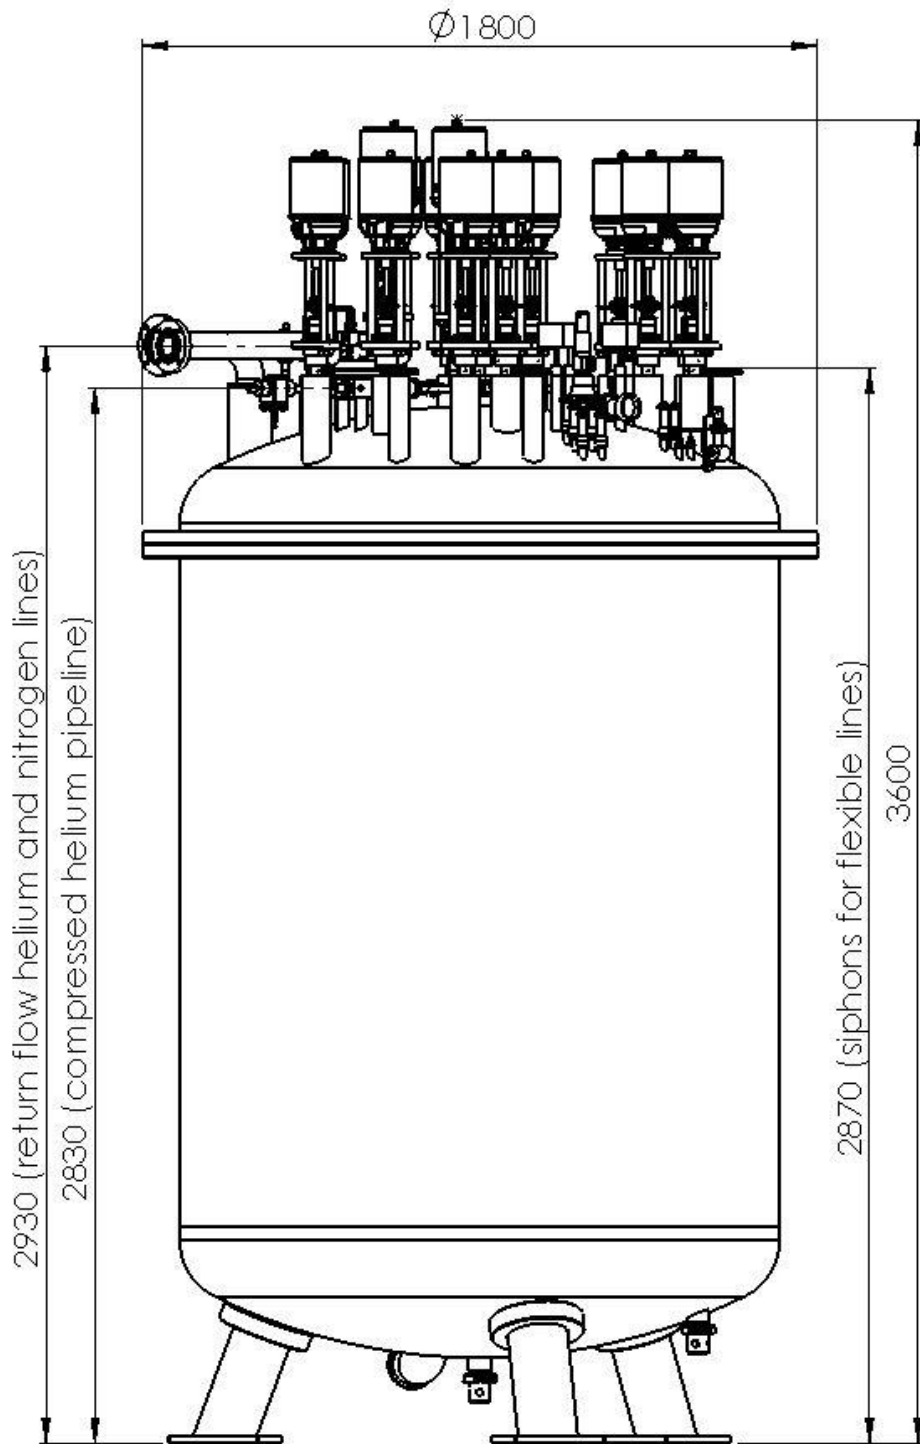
Side view of the refrigerator system for the MPD with geometrical dimensions (standard vacuum vessel) [ILK Dresden].
